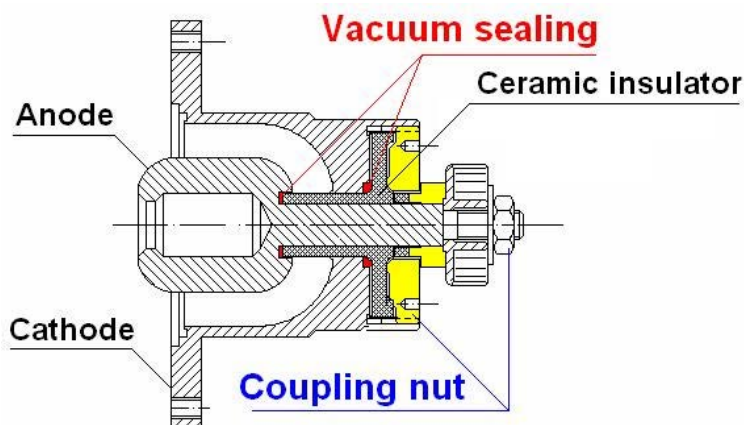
The design drawing of new demountable stainless steel DPF chamber.
